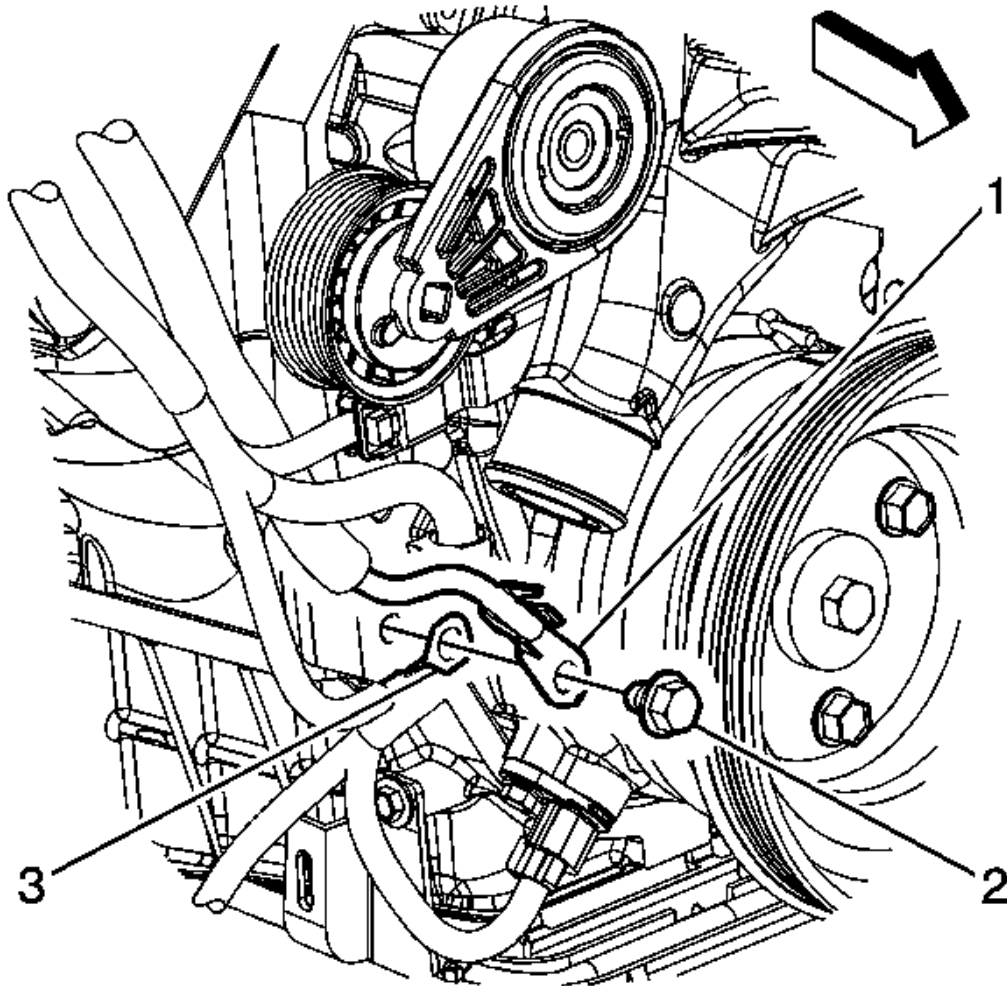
View Of Battery Cable Terminal, Battery Cable Bolt & Wiring Harness Terminal
